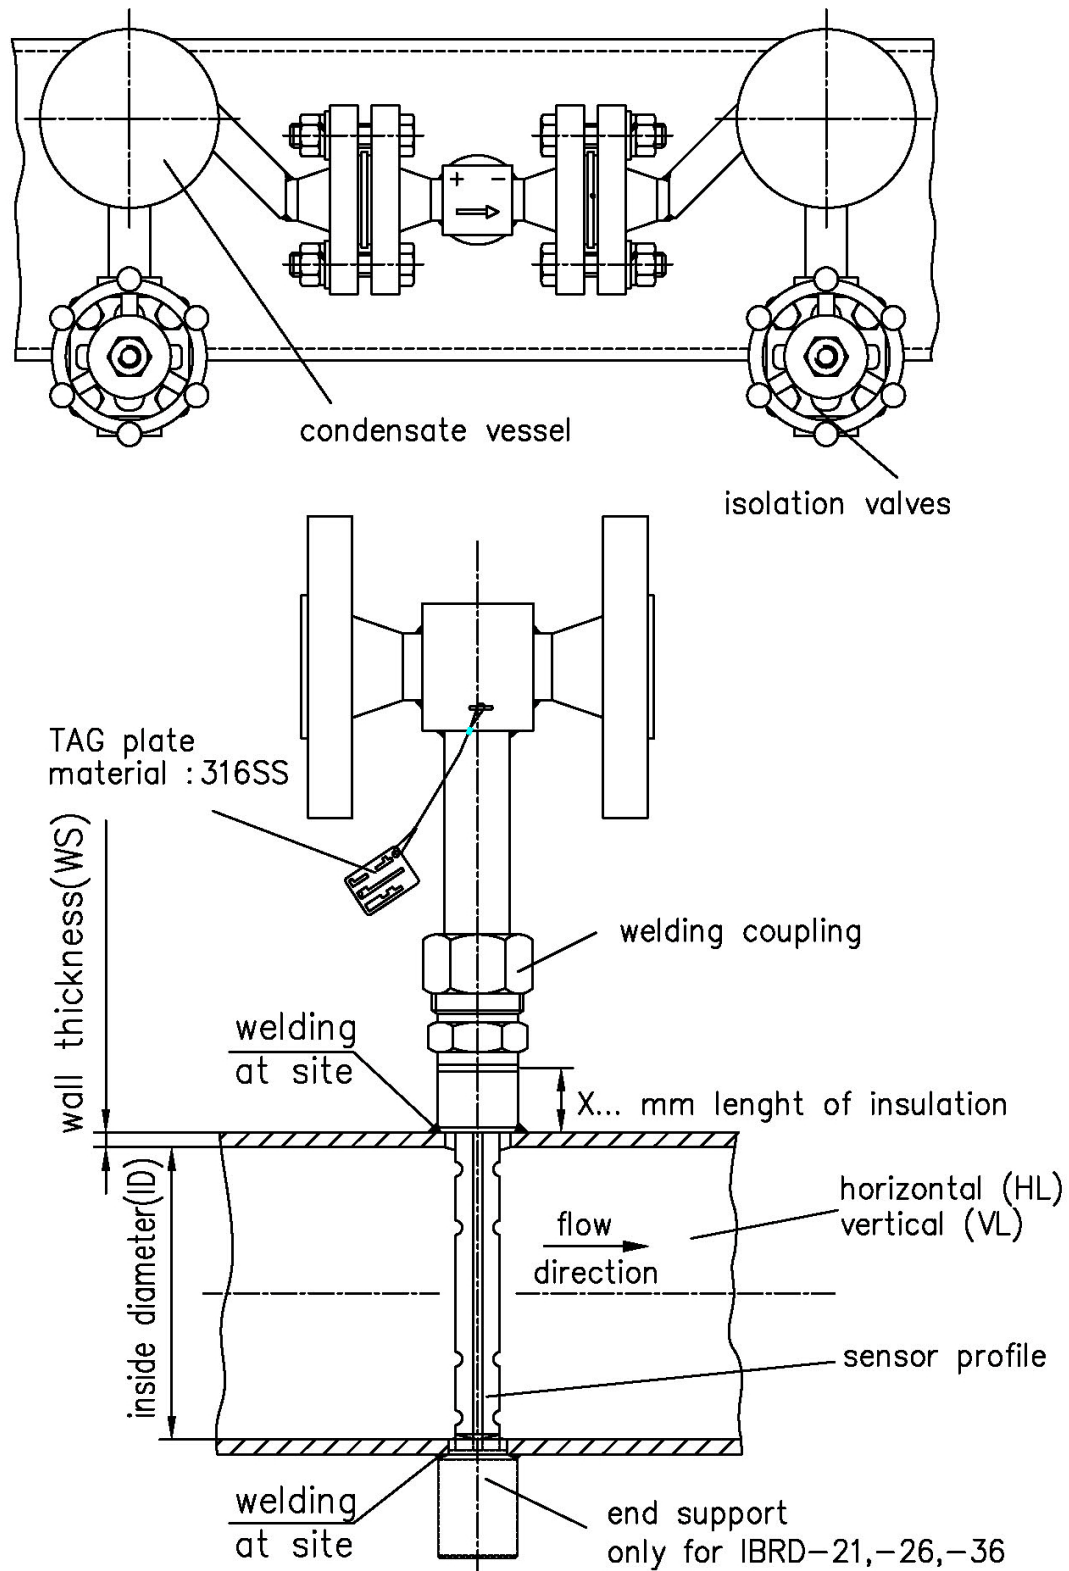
Itabar-Flow-Sensor to measure volumetric steam flow. The components: Threaded weld-o-let sensor head with flanges, condensate pots and screwed-on ANSI-slide valve 800 lbs.
